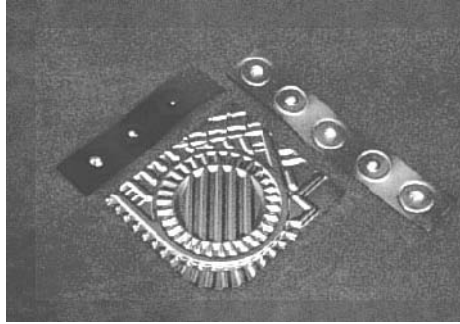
Complex shaped pieces used in assembling the panels for a plate and frame heat exchanger, CP titanium (courtesy J. A. Hall)
